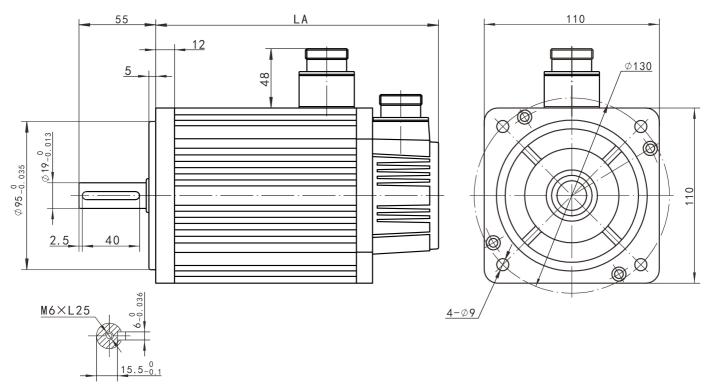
Installation dimension of WE series 110 flange servo motor
